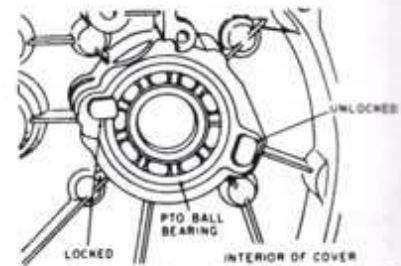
Interior view of crankcase cover and ball bearing locks used on Models HM70, HH70, HM80 and HM100.
